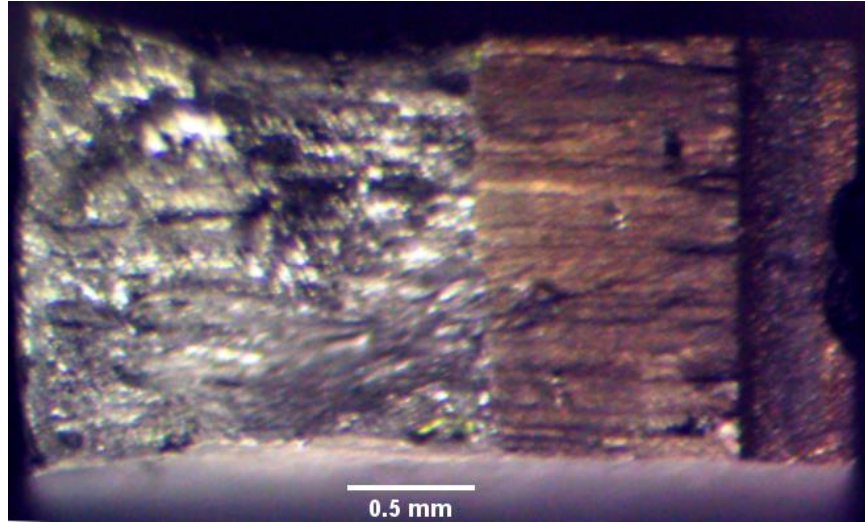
Post-test fracture surface image of one failed ~18 dpa M4CVN specimen after 507°C/18.6dpa irradiation.
